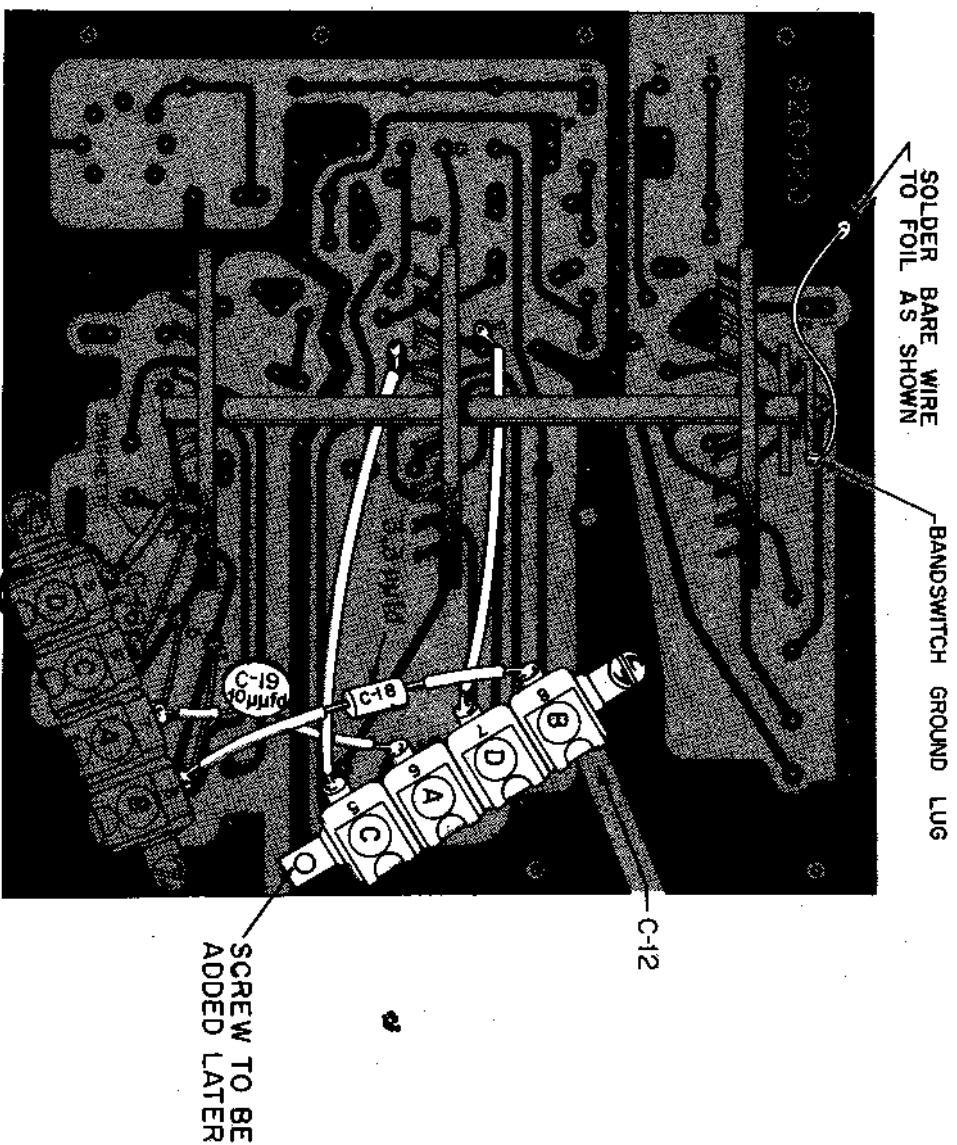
MOUNTING C-12 (TRIMMER STRIP)
